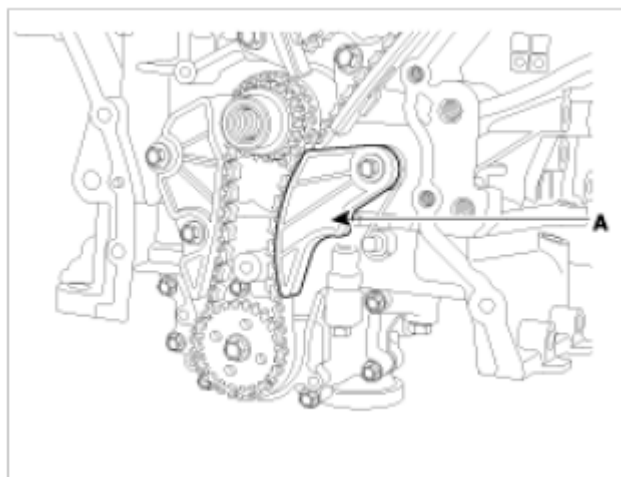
Identifying Oil Pump Chain Tensioner Assembly
